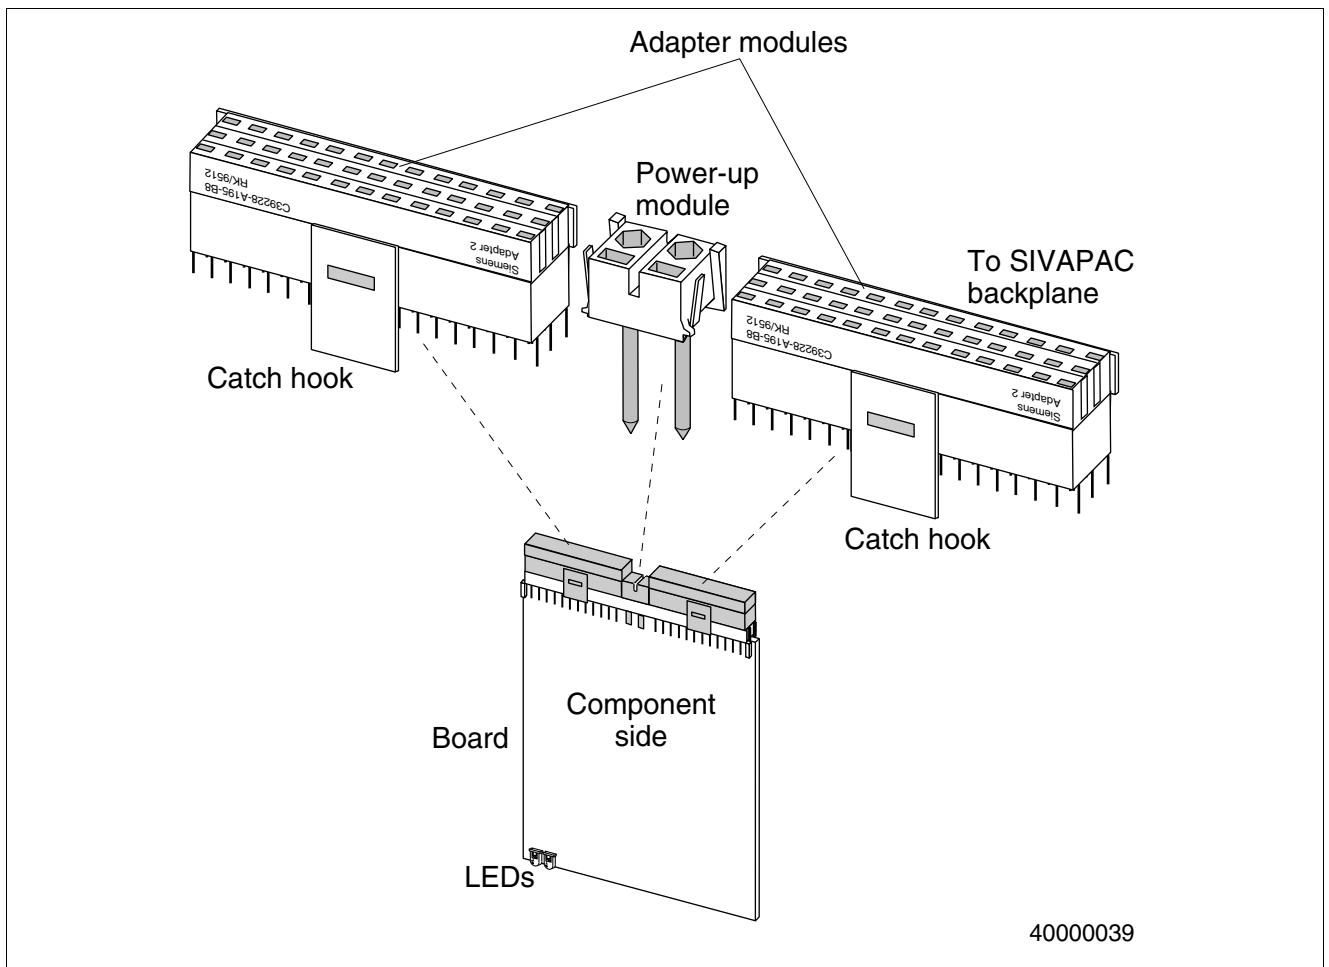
SIPAC to SIVAPAK Board Adapter 2
